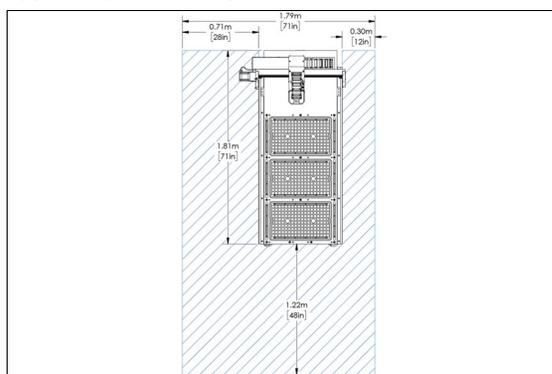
Dimensions of the machine and its required added space, as viewed from above.
